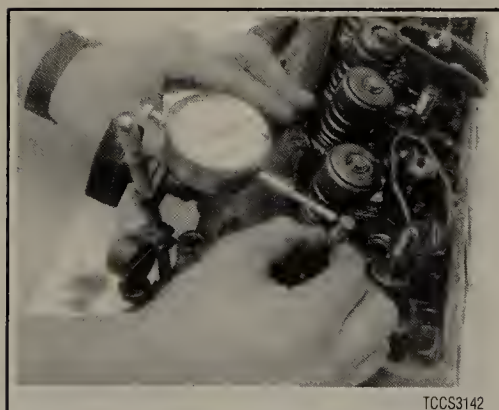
A dial gauge may be used to check valve stem-to-guide clearance; read the gauge while moving the valve stem
